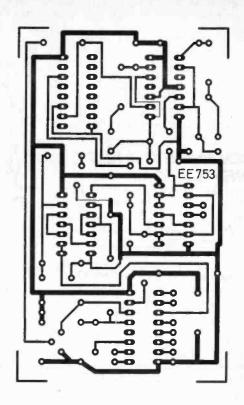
Printed circuit board component layout and full size copper foil master pattern for the Display Unit.
